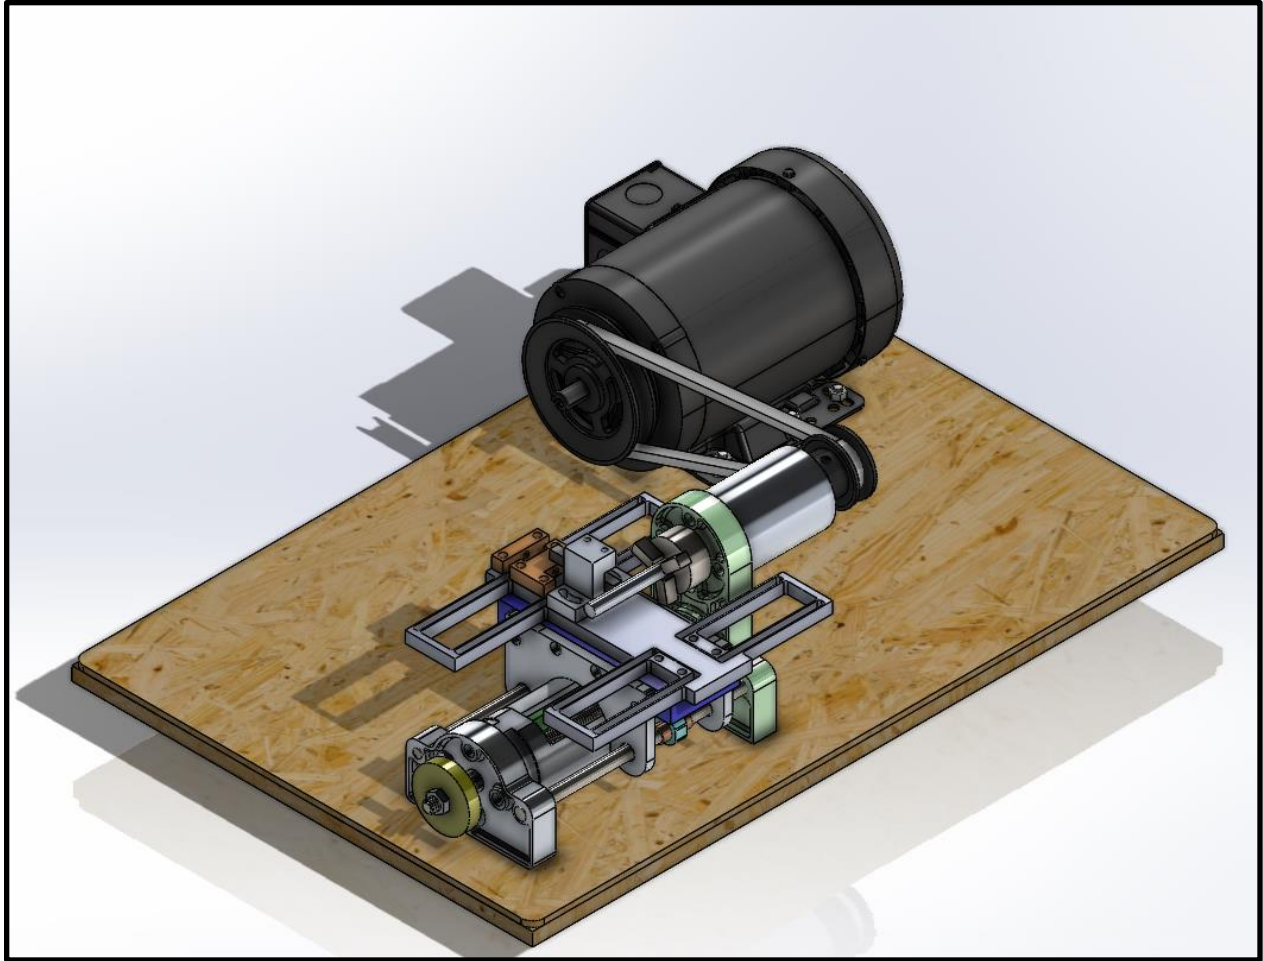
Isometric view of the motor and lathe on the mounting platform.
